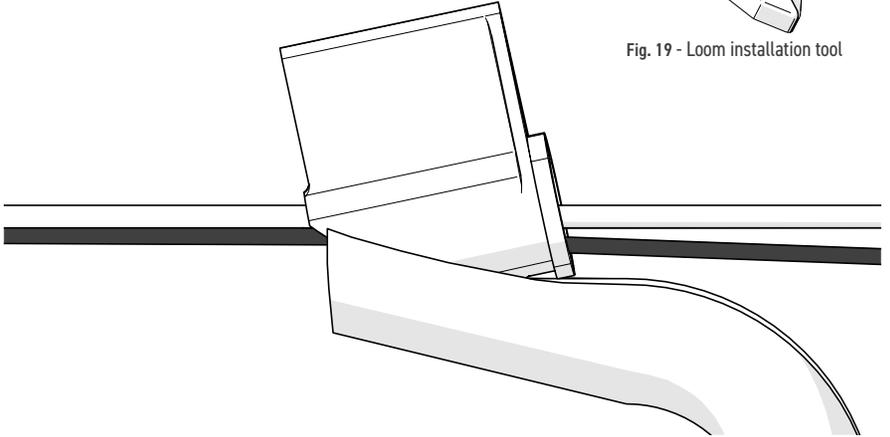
Wrap sleeving around cables and tubes using loom installation tool
